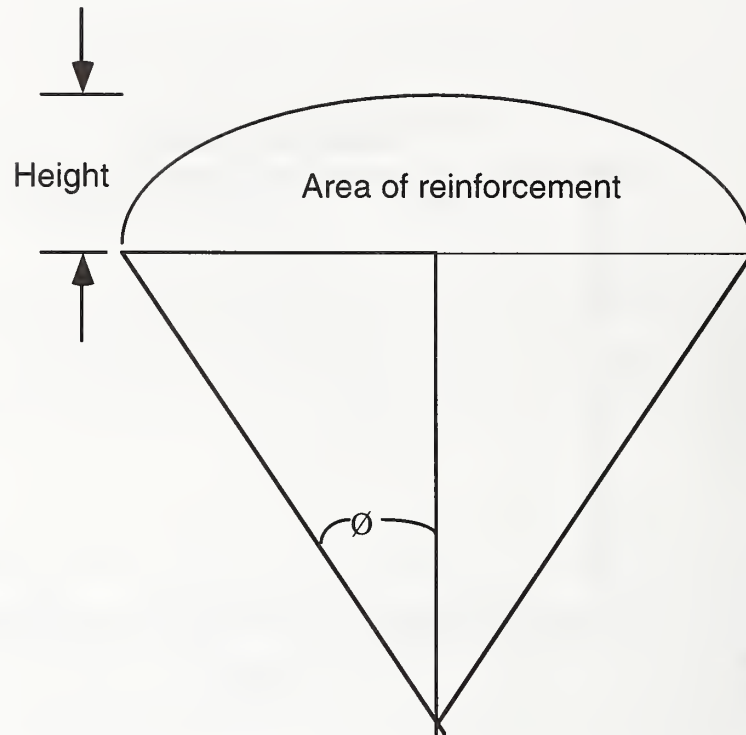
The drawing depicts the geometry of the cross section of the bead-on-plate weld.
